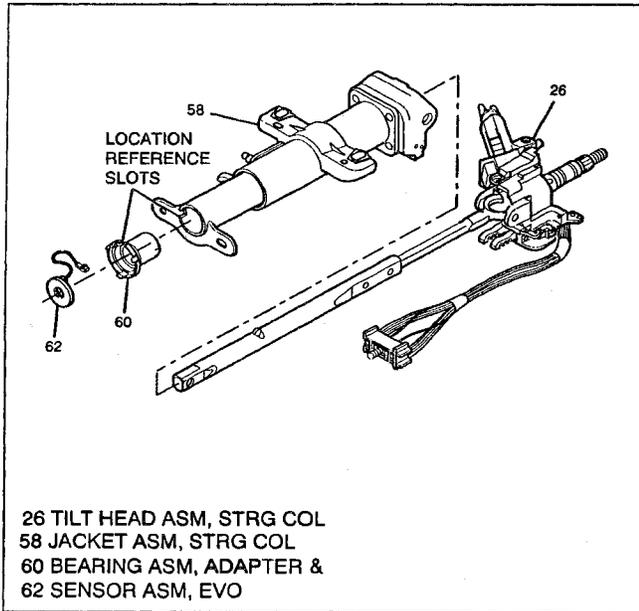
Removing Tilt Head Assembly with Steering Shaft
